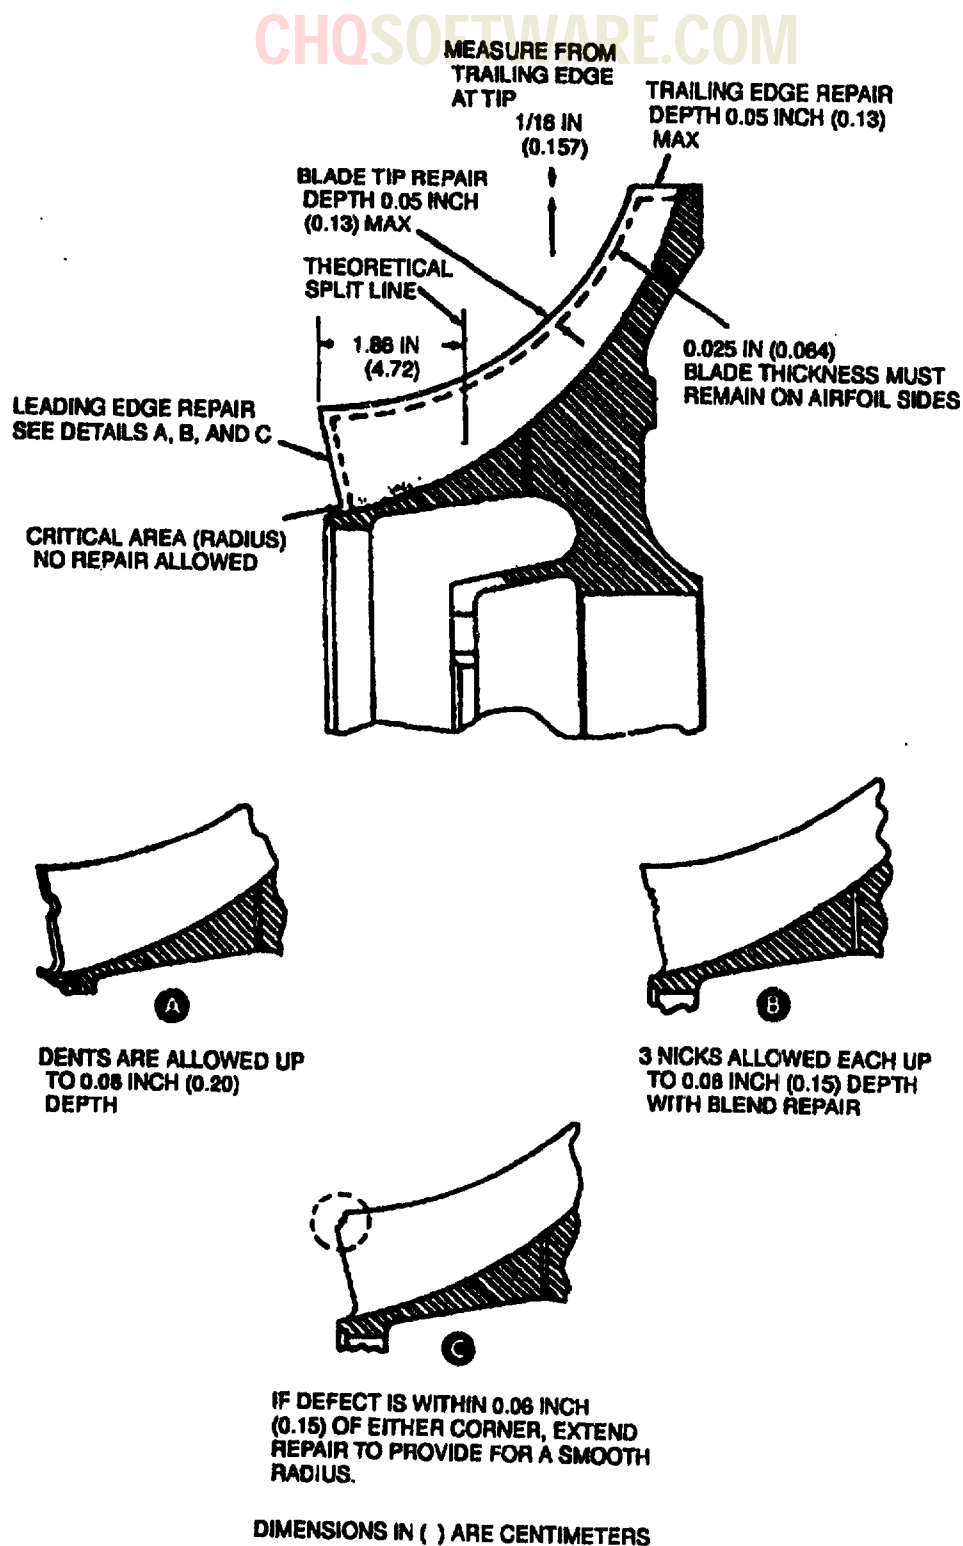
Centrifugal Compressor Impeller Blade Inspection and Repair.
